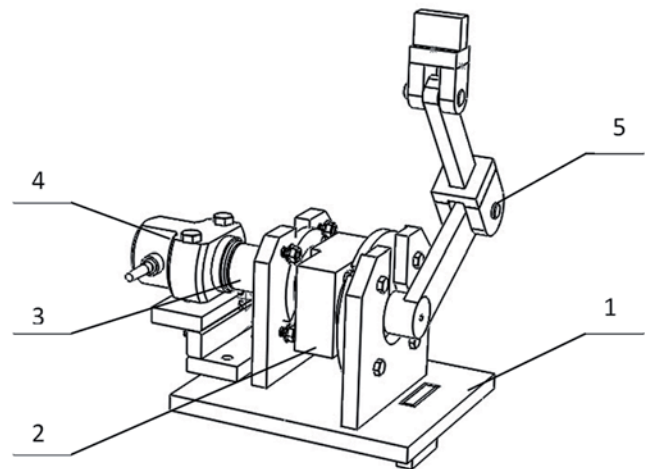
Test stand device for the determination of the fatigue life of gears; 1 – mounting base, 2 – gears, 3 – clutch, 4 – torque sensor, 5 – crankshaft mechanism.
